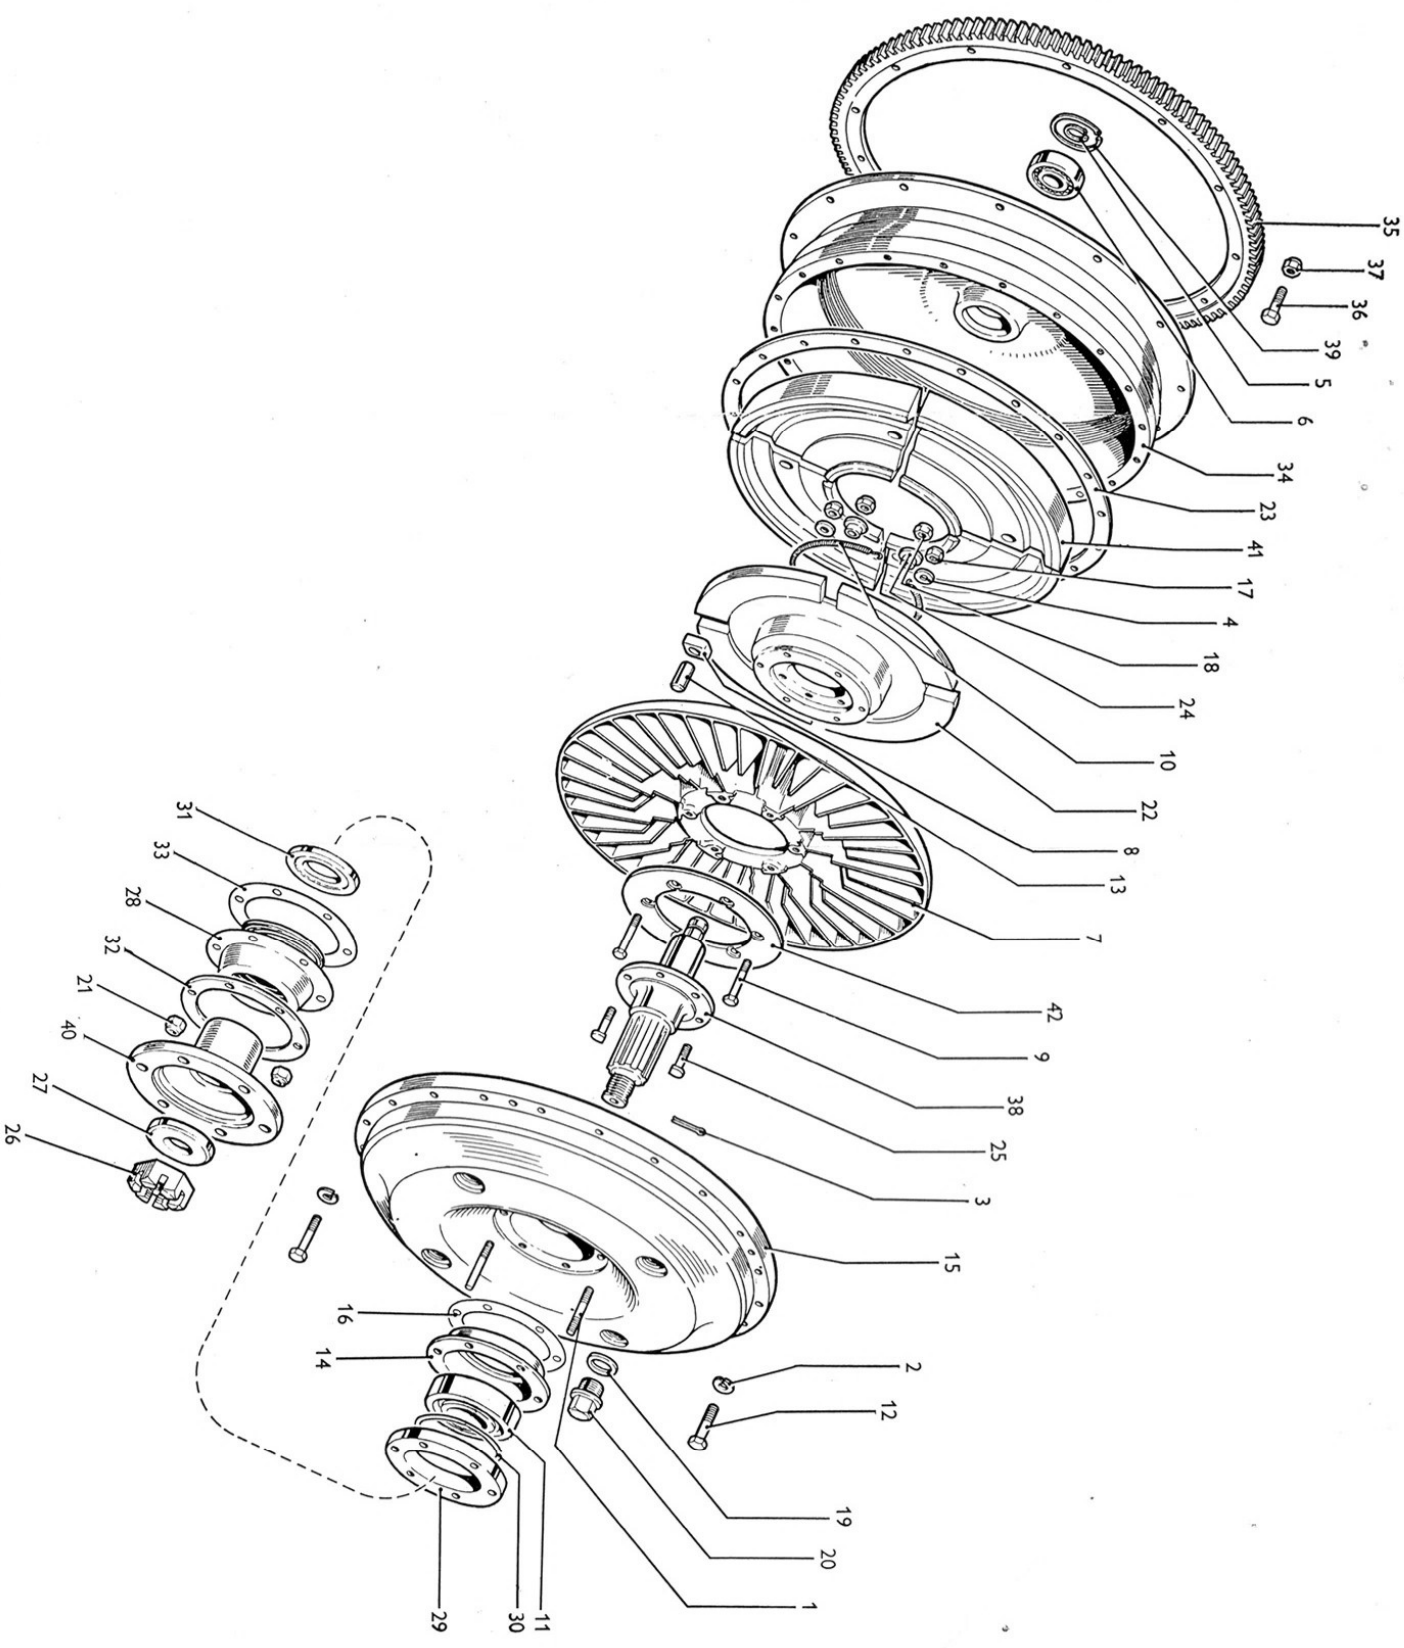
EXPLODED VIEW OF THE 18" FLUID CLUTCH
